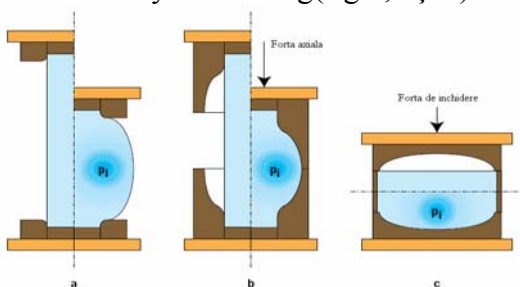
Types of hydroforming process: a – free hydroforming; b – mould hydroforming with longitudinal separation plane; c – mould hydroforming with cross-sectional separation plane. Mould hydroforming is divided according to the mould used, such as:
